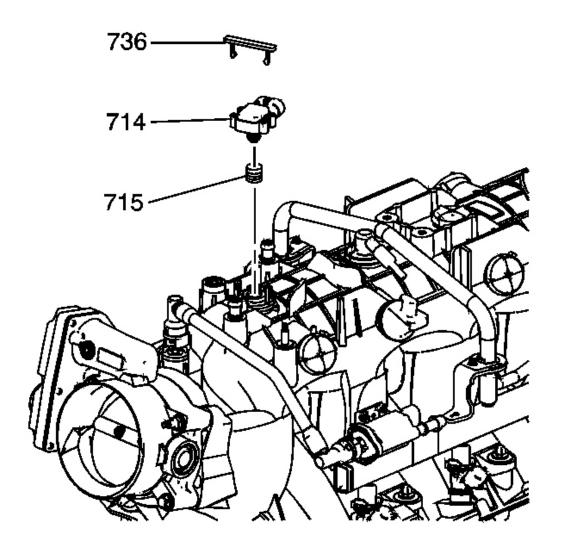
MAP Sensor Courtesy of GENERAL MOTORS CORP.
